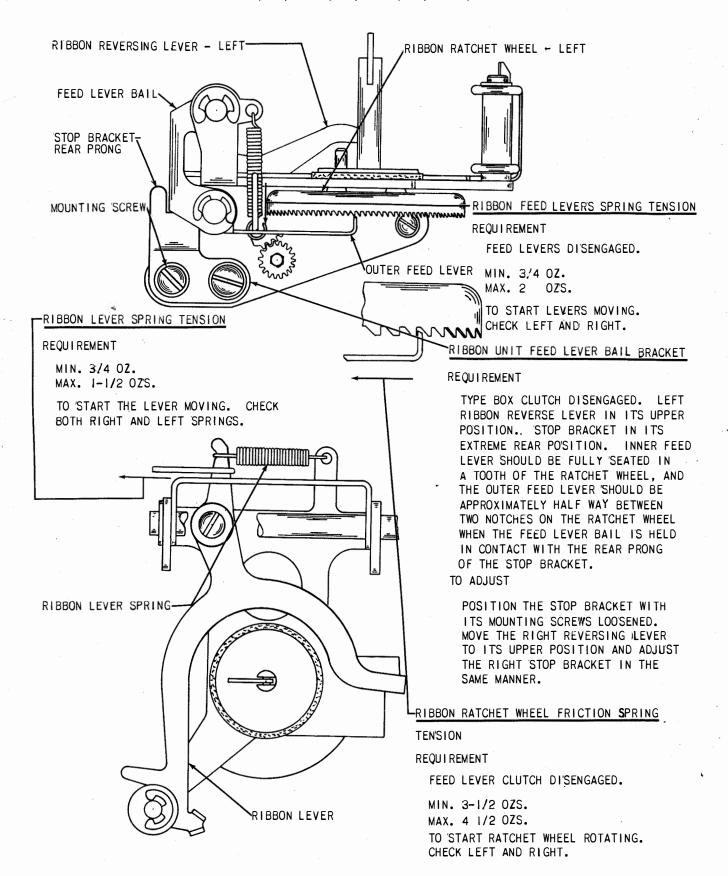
Automatic Typer, Ribbon Feed Mechanism
